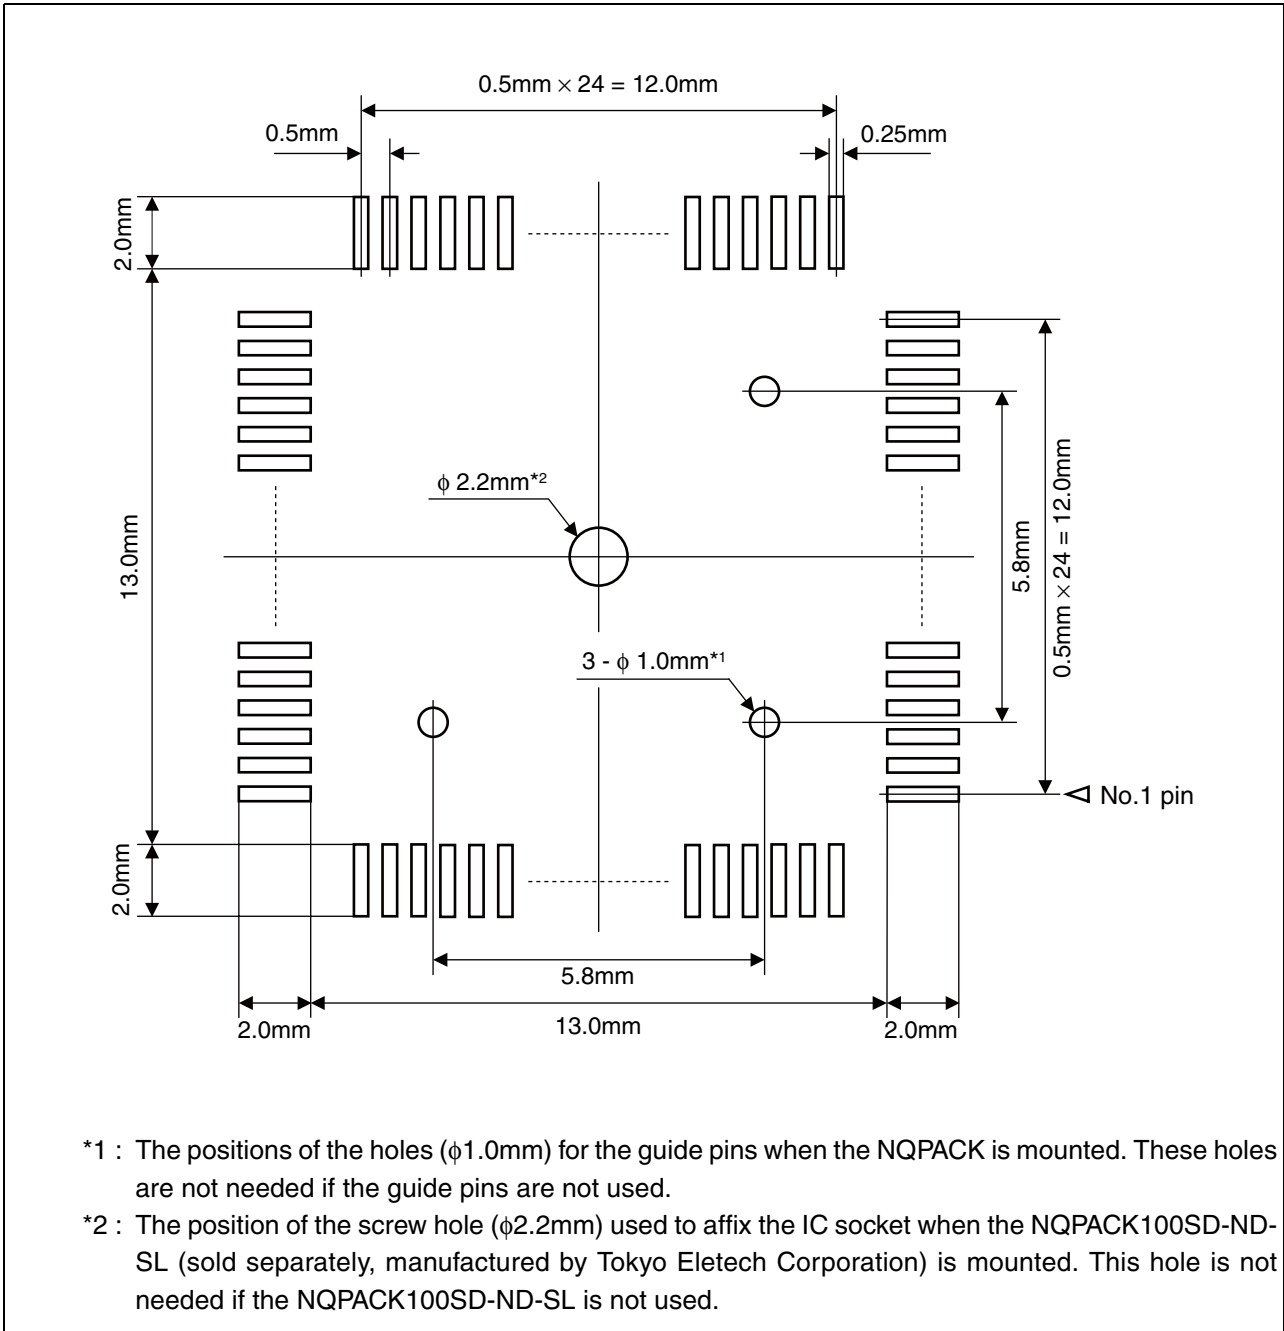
Recommended dimensions of the footprint for mounting the NQPACK
